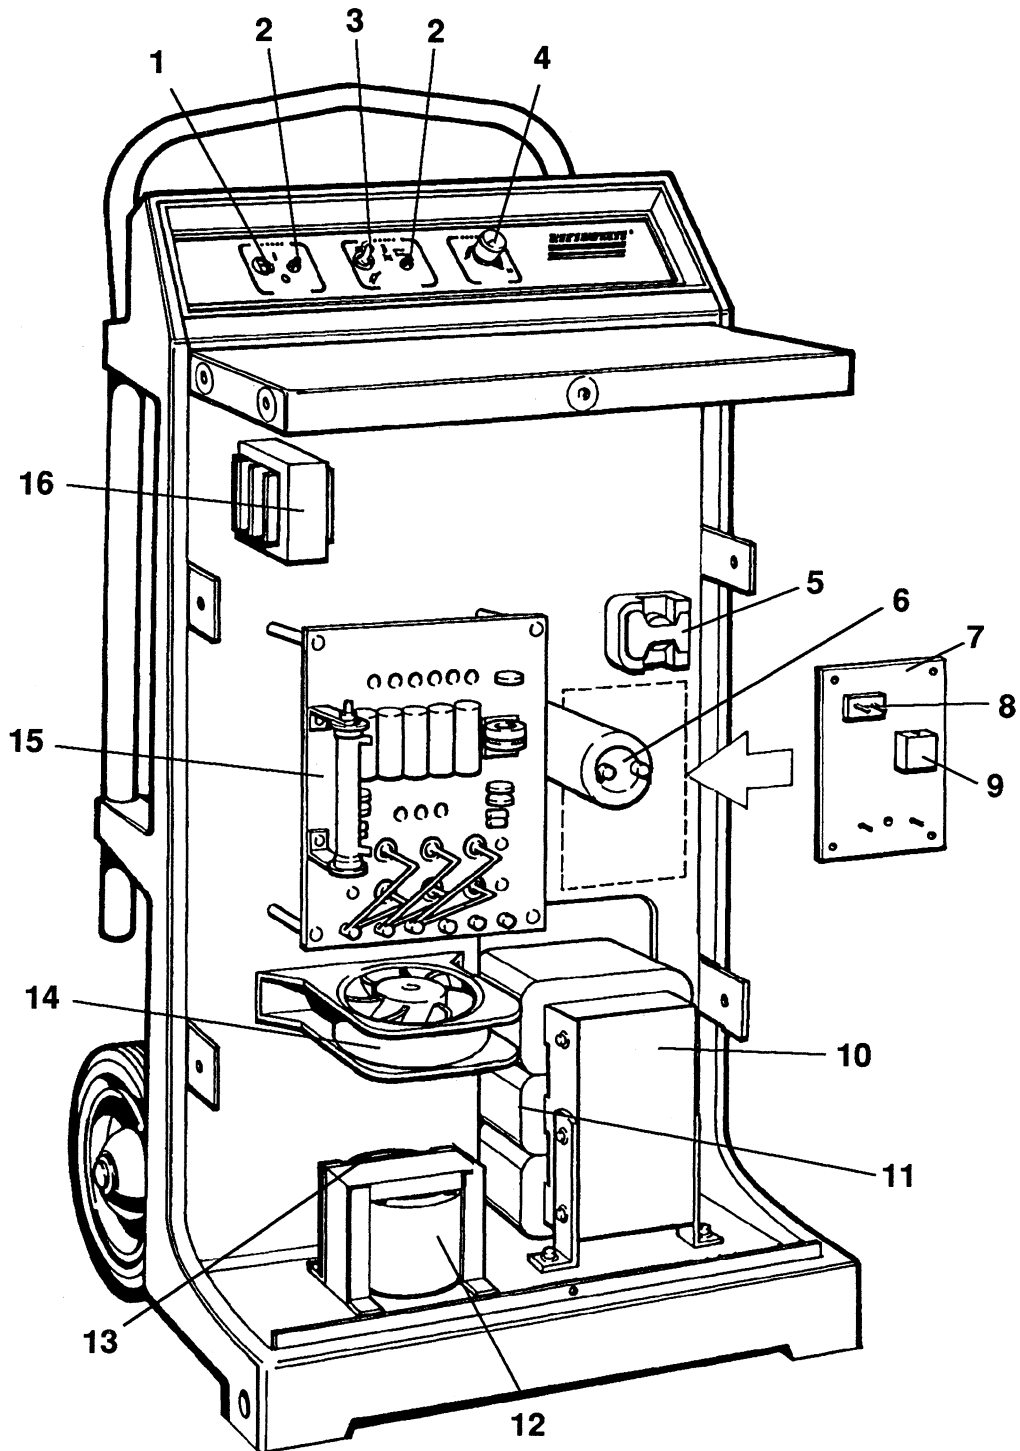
A Three-Phase Power Supply w/ CH50 Chopper - Front View
